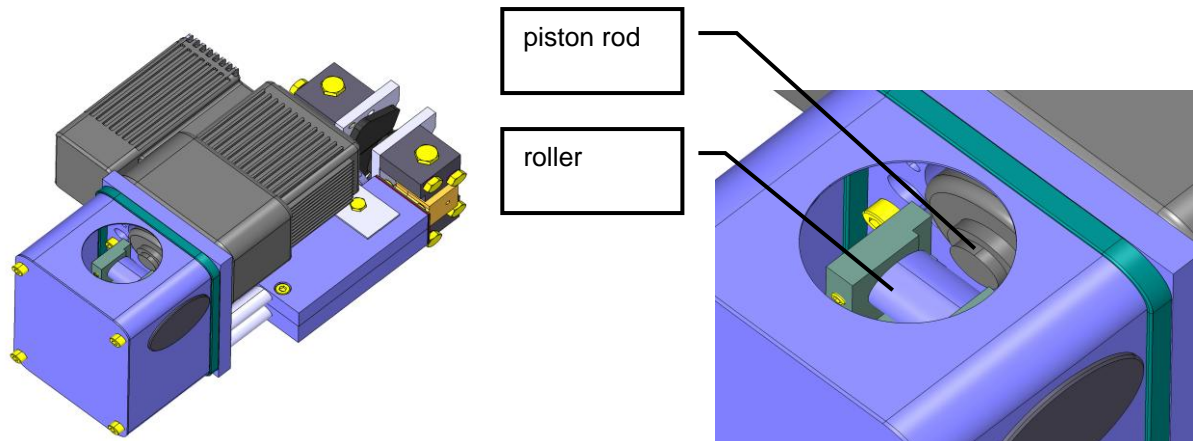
Checking the reserve stroke indirectly at the thruster piston rod
